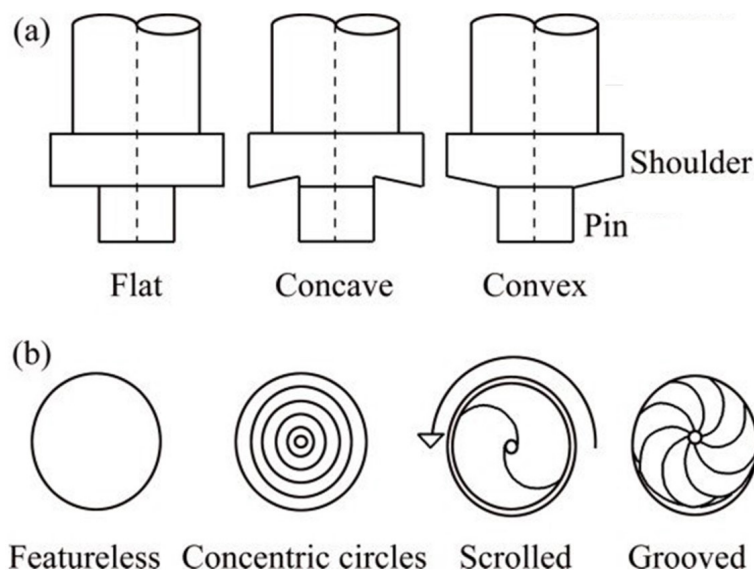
Different types of FSW tool shoulder (a) and shoulder bottom surface features (b) [39].
